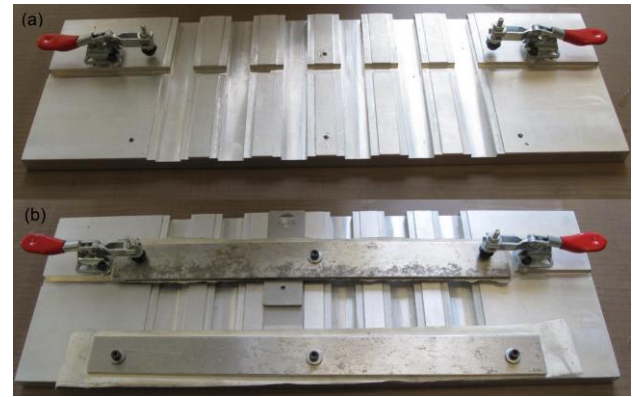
(a) As fabricated jig used to align lap shear samples during freezing and (b) jig with sample loaded.
